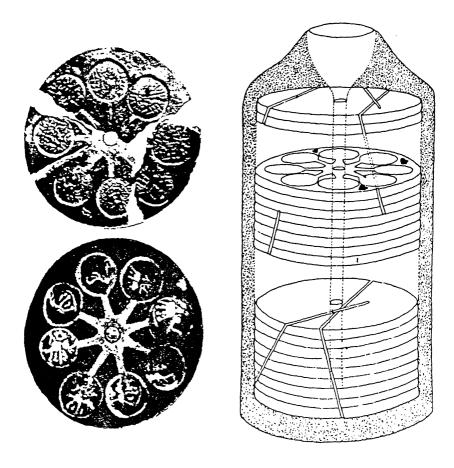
Terracota mould disks for coins and their assembly ready for casting
